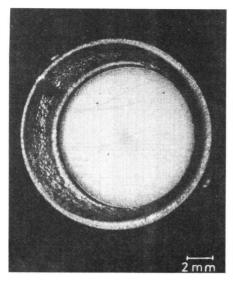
Fracture surface of plasmanitrided tension-compression specimen
